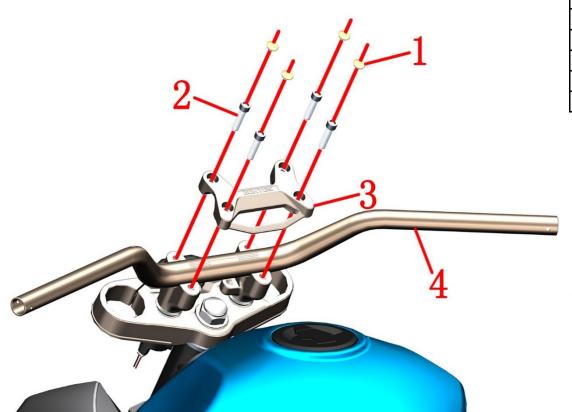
FRONT FORK COMPONENT		Directional lever component	СНК	Q
